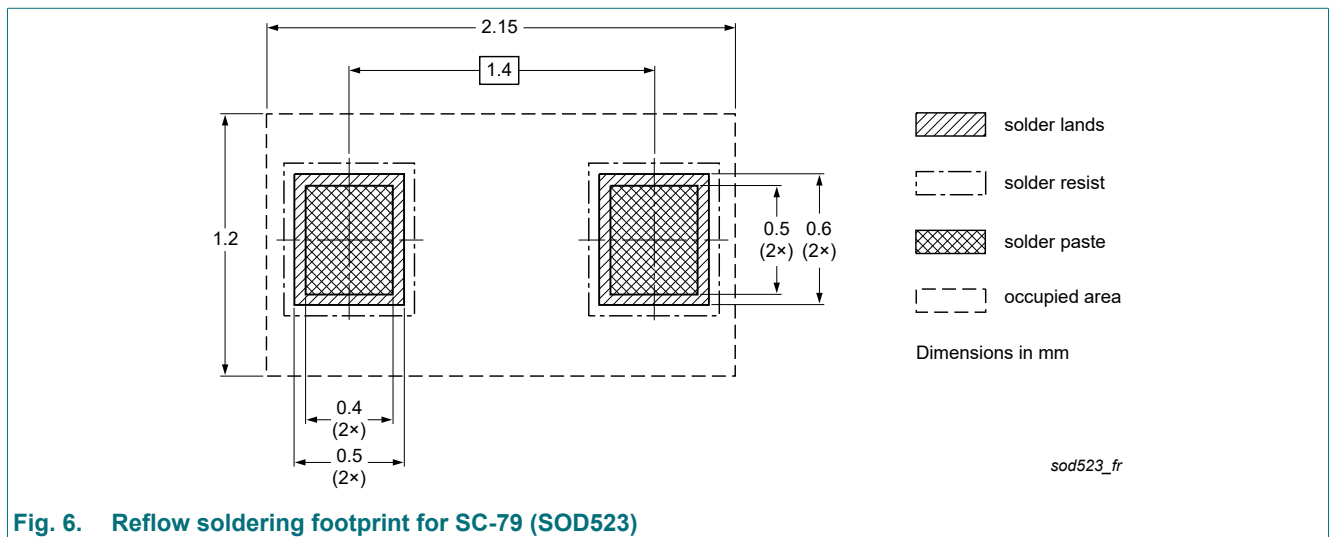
Reflow soldering footprint for SC-79 (SOD523)
